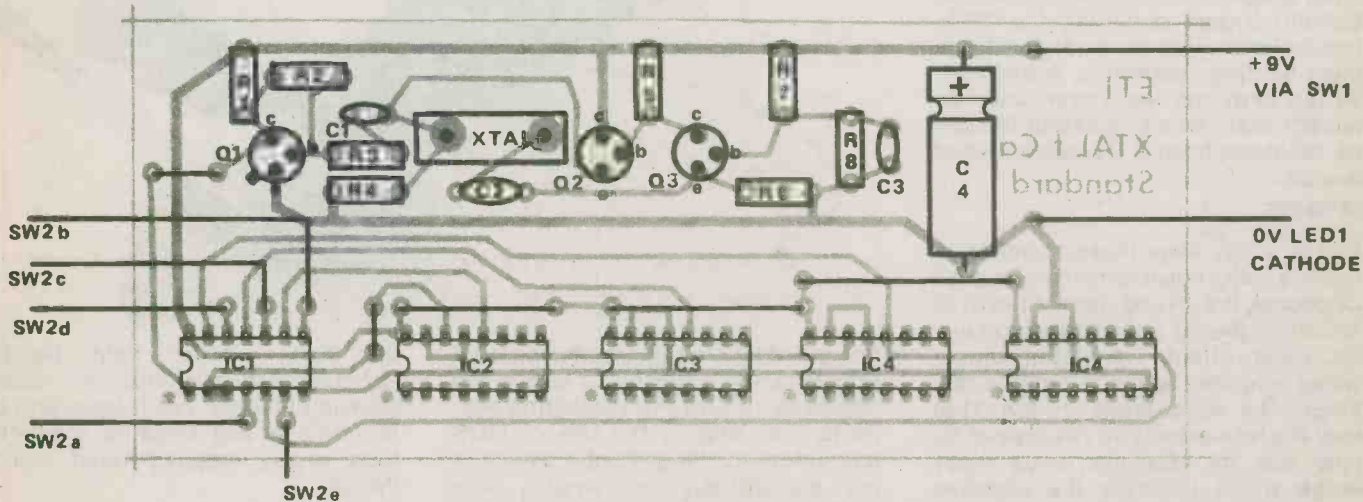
Component overlay. The ICs are mounted in sockets. Construction of the board is fairly straightforward.
